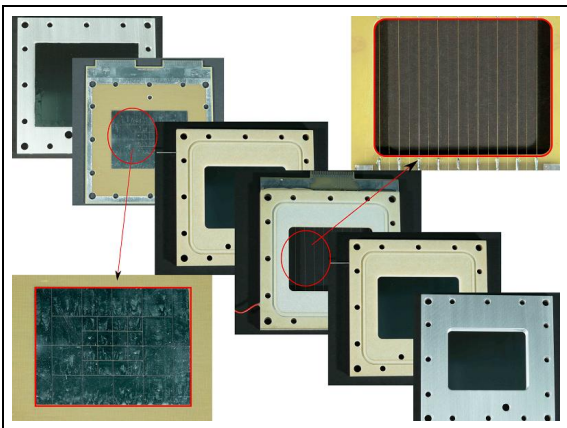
Exploded view of the chamber with the main components. Anode planes are additionally enlarged.
